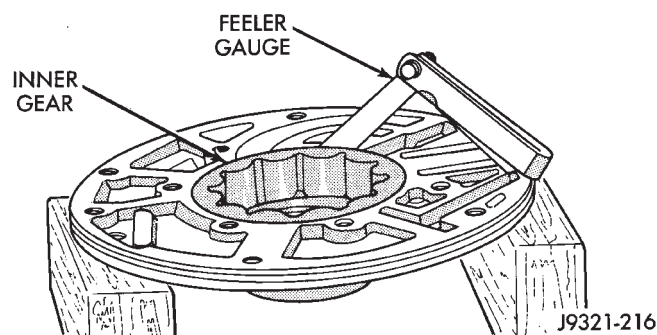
Measuring Pump Housing-To-Inner Gear Clearances
